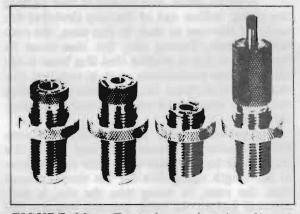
Typical case-forming die set. The die at the right is a conventional sizer, used for final sizing and reloading the previously reworked brass.
